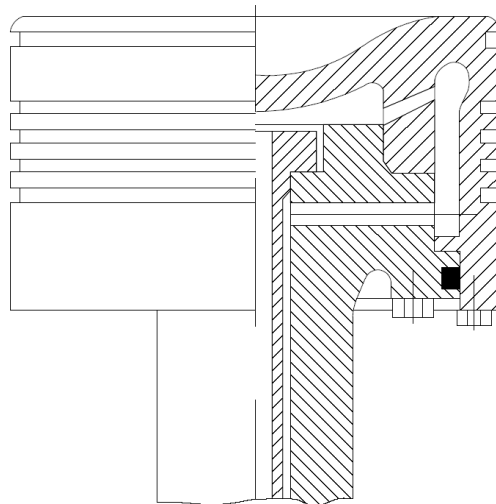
Piston of the 6DKRN 80/230 engine
